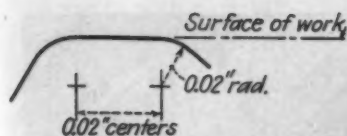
Tool form illustrated has produced surface finish down to one microinch on aluminum pistons.
